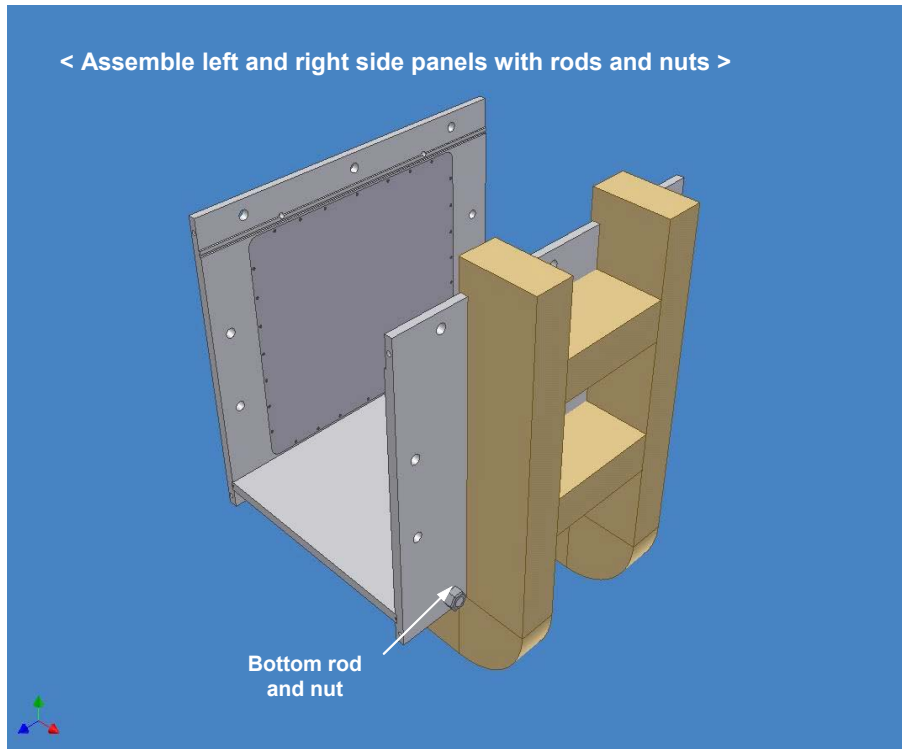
Step 3 (assemble left and right side panels with rods and nuts)
